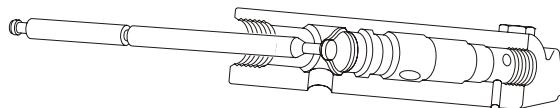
Insert bumper hook through center of bumper and pull straight out.
